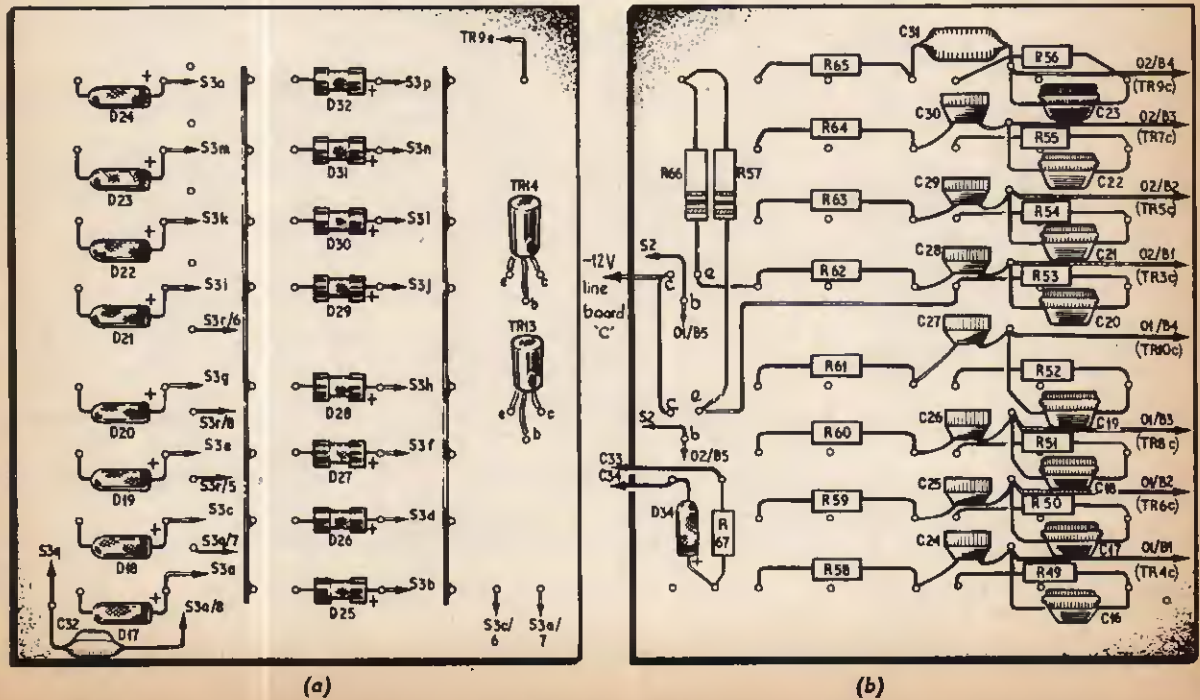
Component layout and wiring for differentiator board "B". (a) topside view; (b) underside view
